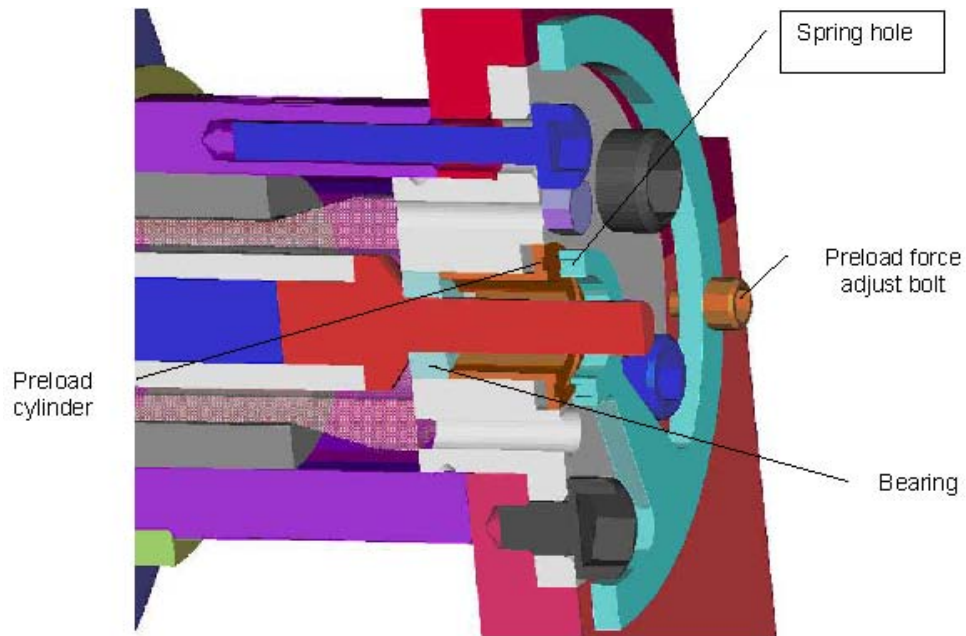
(b) Ball bearing spring preload structure—elevation.
